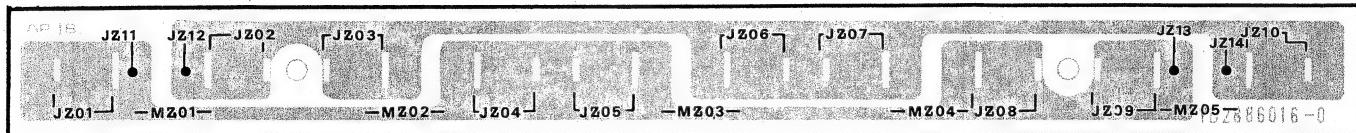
Dial Lamp Board – PZ01 Component Assembly Diagram
